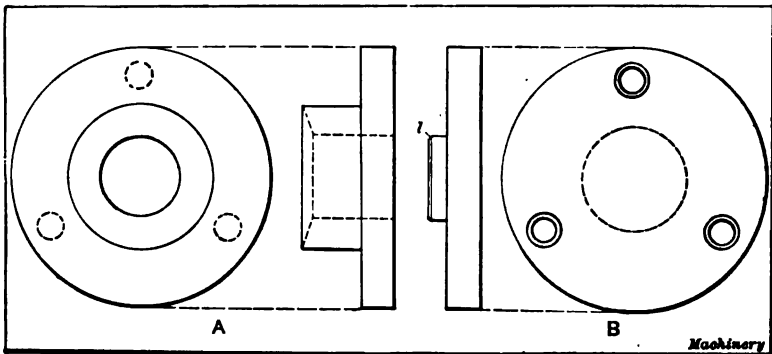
(A) Packing Gland. (B) Drill Jig for Gland
